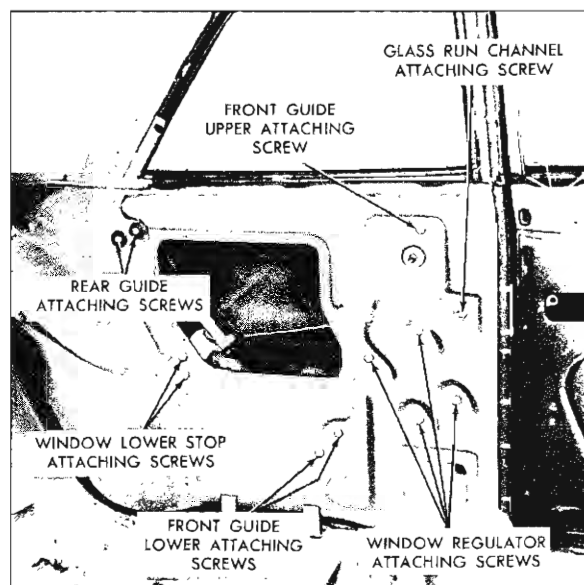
Rear Quarter Hardware "11" Electric Styles
